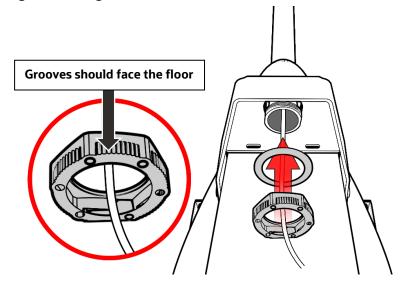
Underside view of TAL mounting bracket showing installation of the large rubber washer and large retaining nut.
